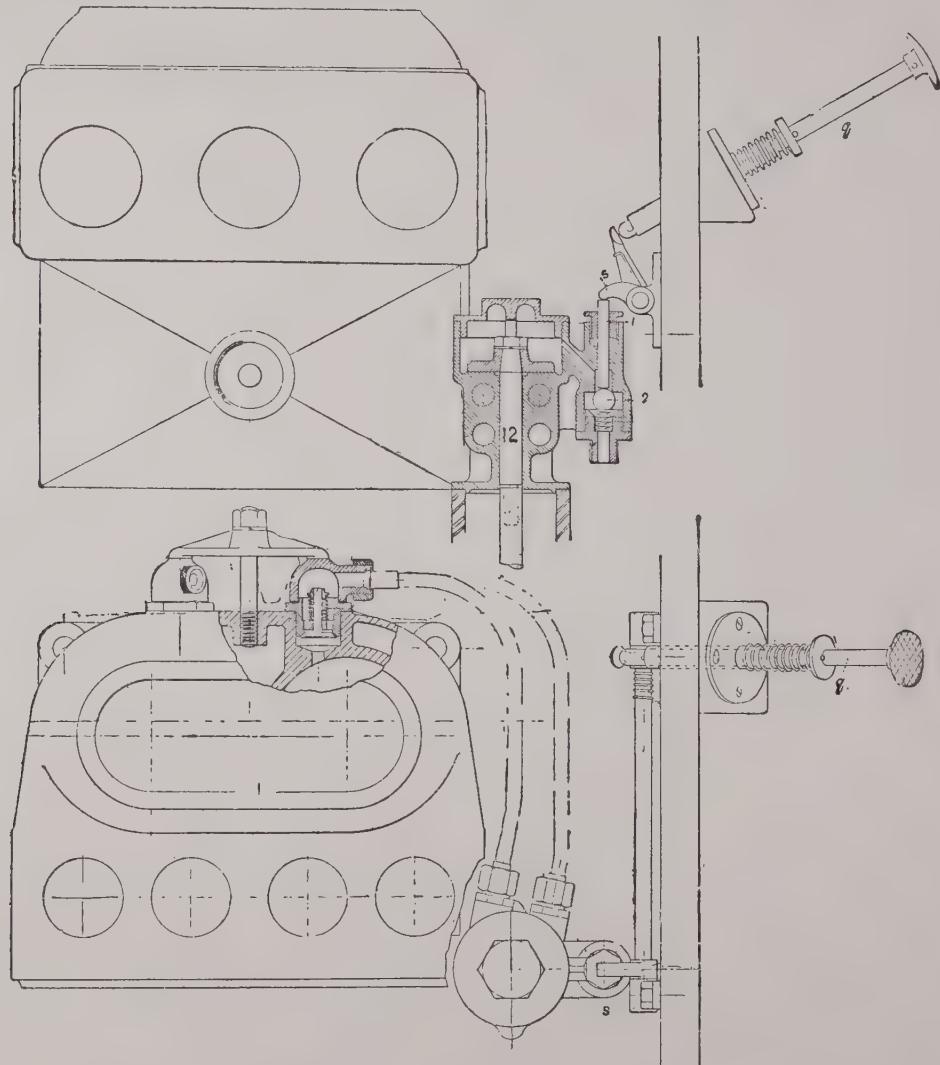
Part Section Adams Engine, showing Starting Gear.
